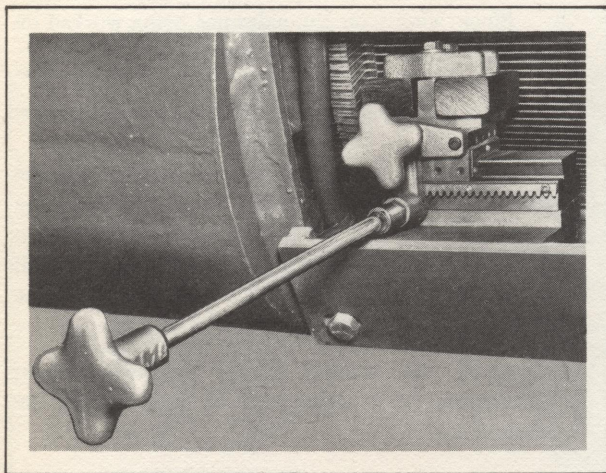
MIDGET COMMUTATOR GRINDER INSTALLED IN GE752 MOTOR.
